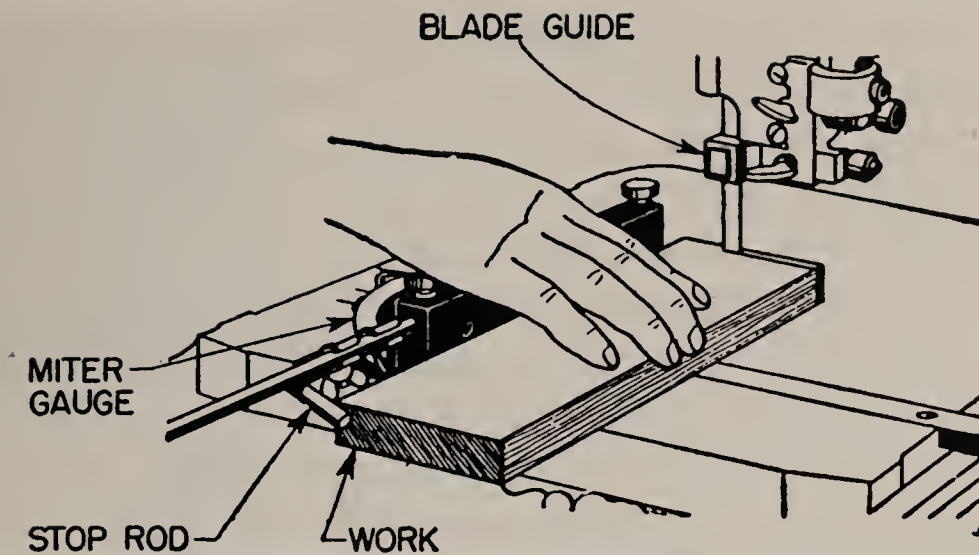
Cutting to length with a miter gauge and stop rod. The stop rod should be carried on the outer end of the miter gauge.
